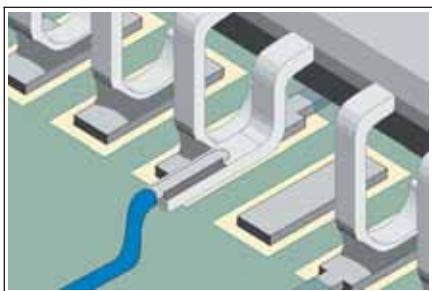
Not Recommended Wire soldered to lead, over component.
